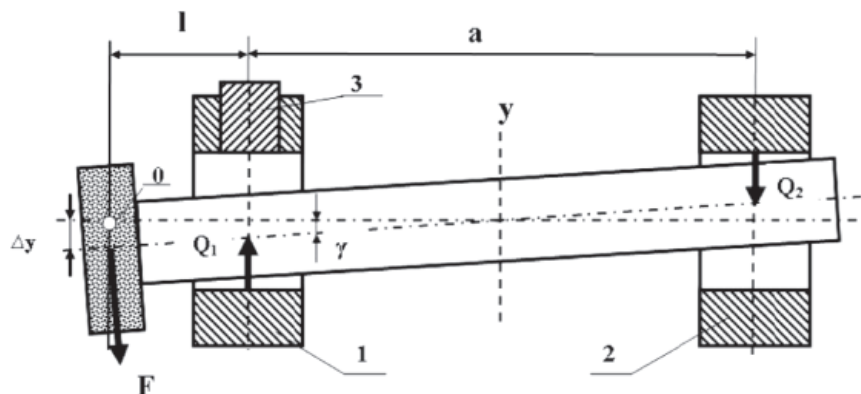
The SU scheme to mount the grinding wheel on the spindle bracket:
